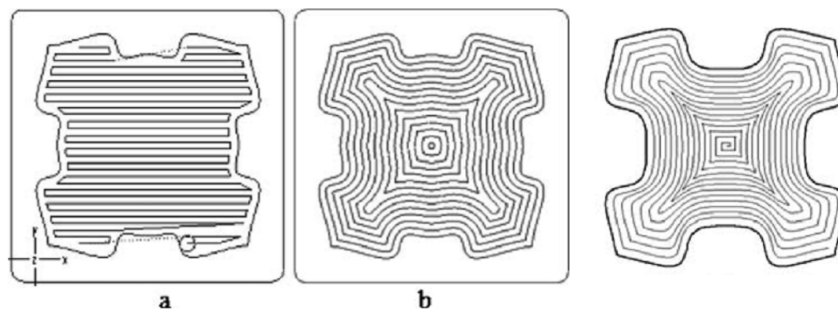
Pocket milling strategies: (a) zigzag machining (b) contour-parallel machining (c) spiral contouring
